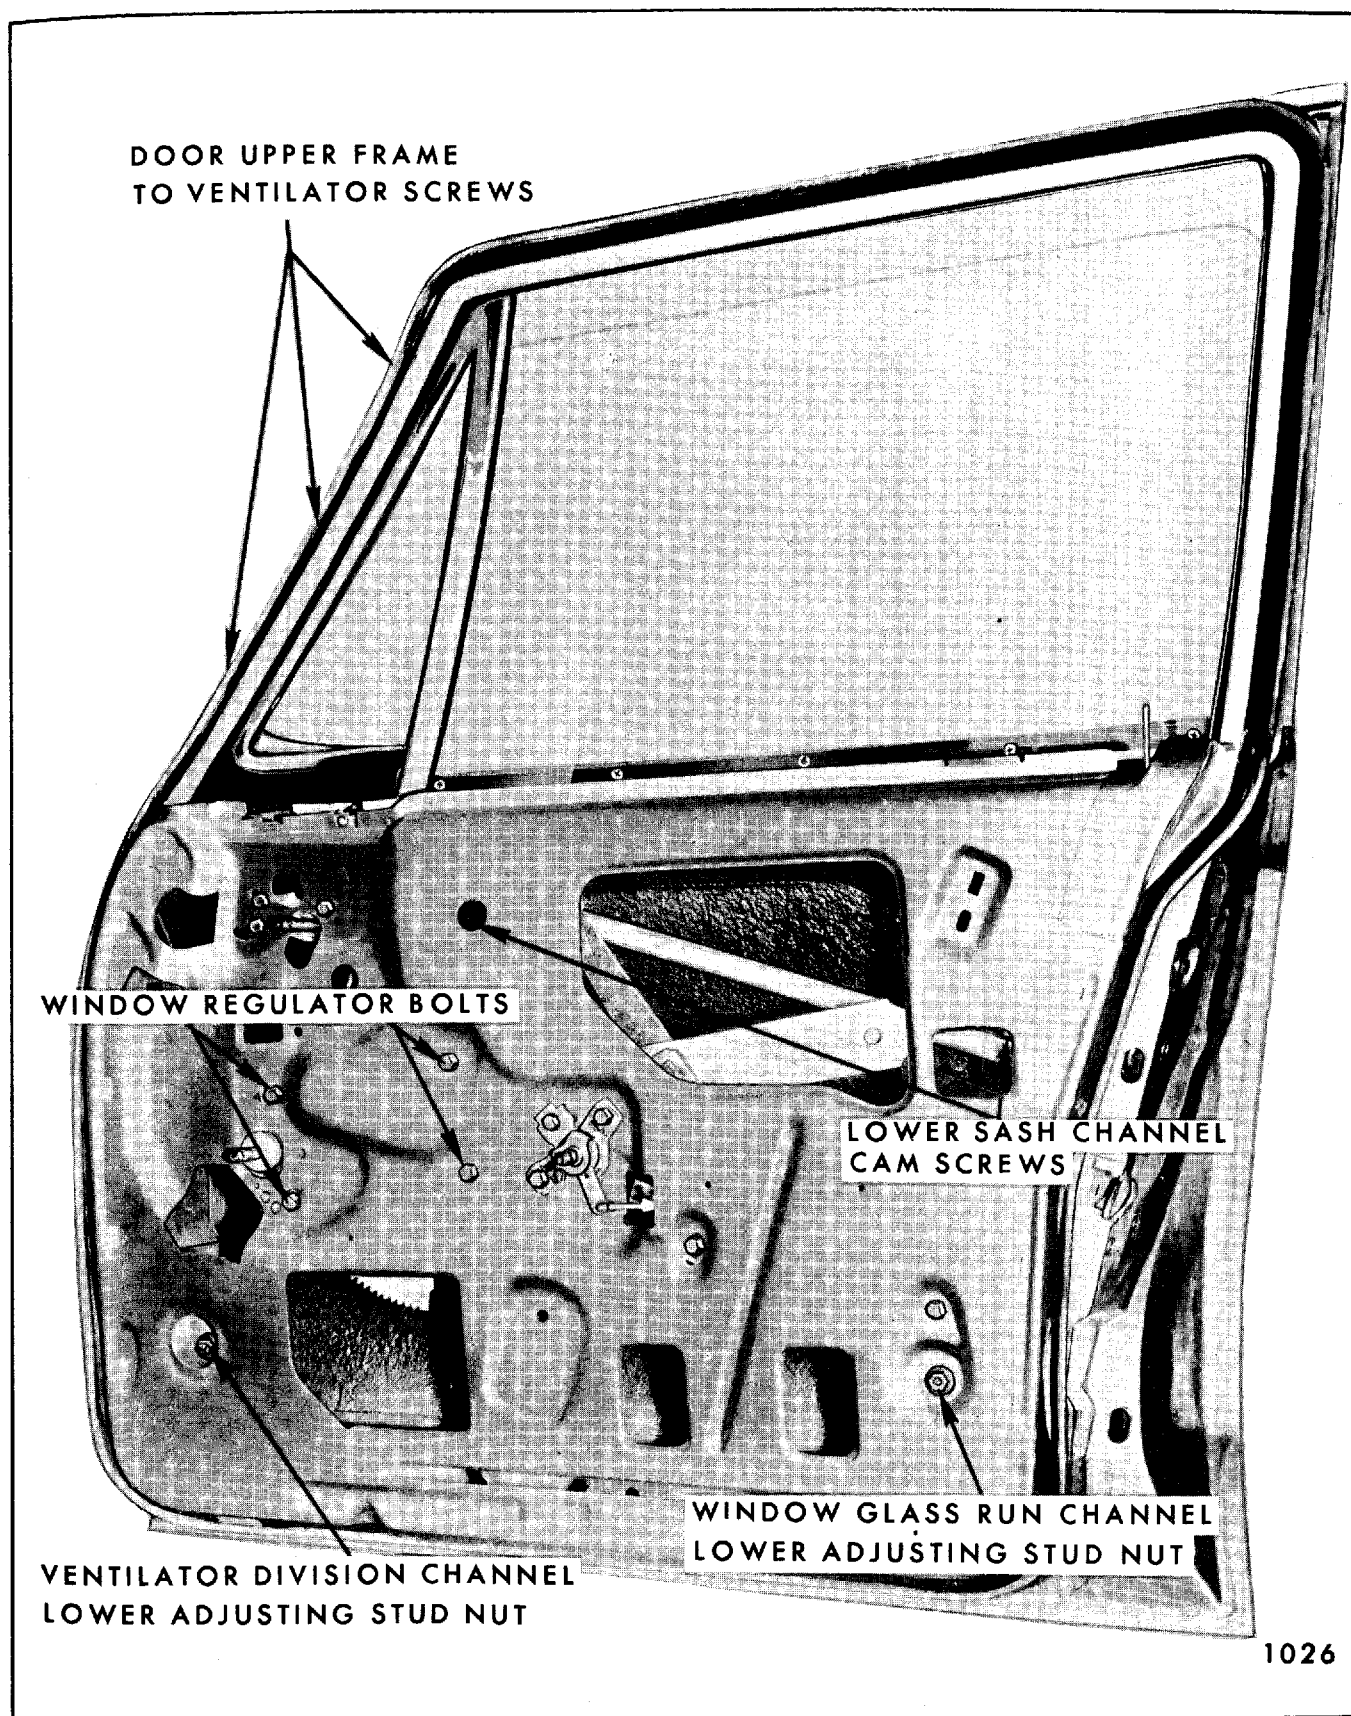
Door Ventilator and Regulator Attachment - "B & C" Closed Styles
